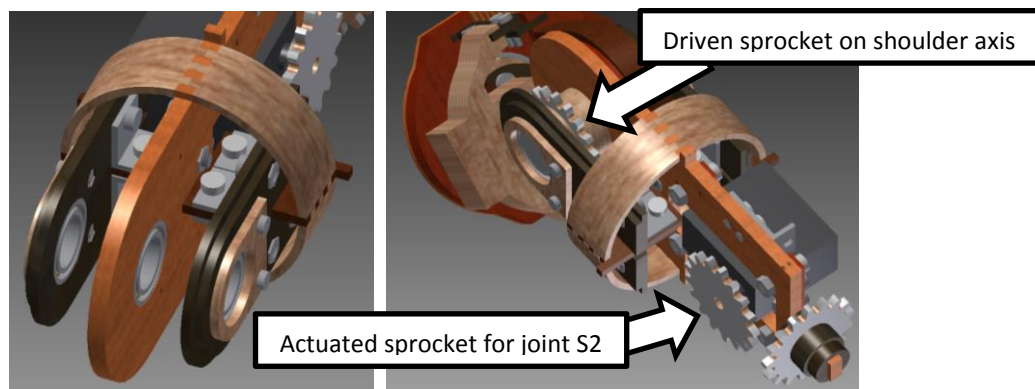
Mounting location for the shoulder axis in module F, actuated and driven sprockets for joint S2
